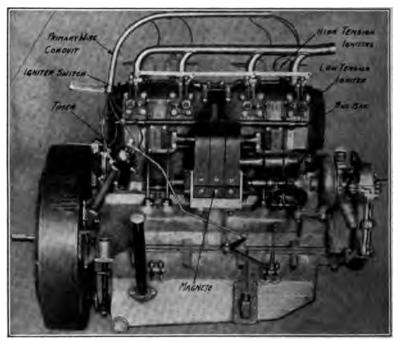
Side View of Engine Used on Early Columbia Automobile Having Both High and Low Tension Ignition System.
